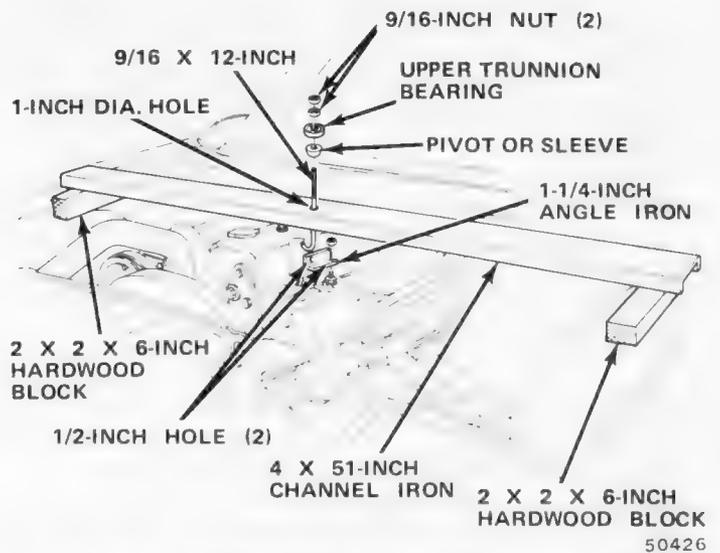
B-70 Engine Holding Fixture—Typical (Pacer shown)
